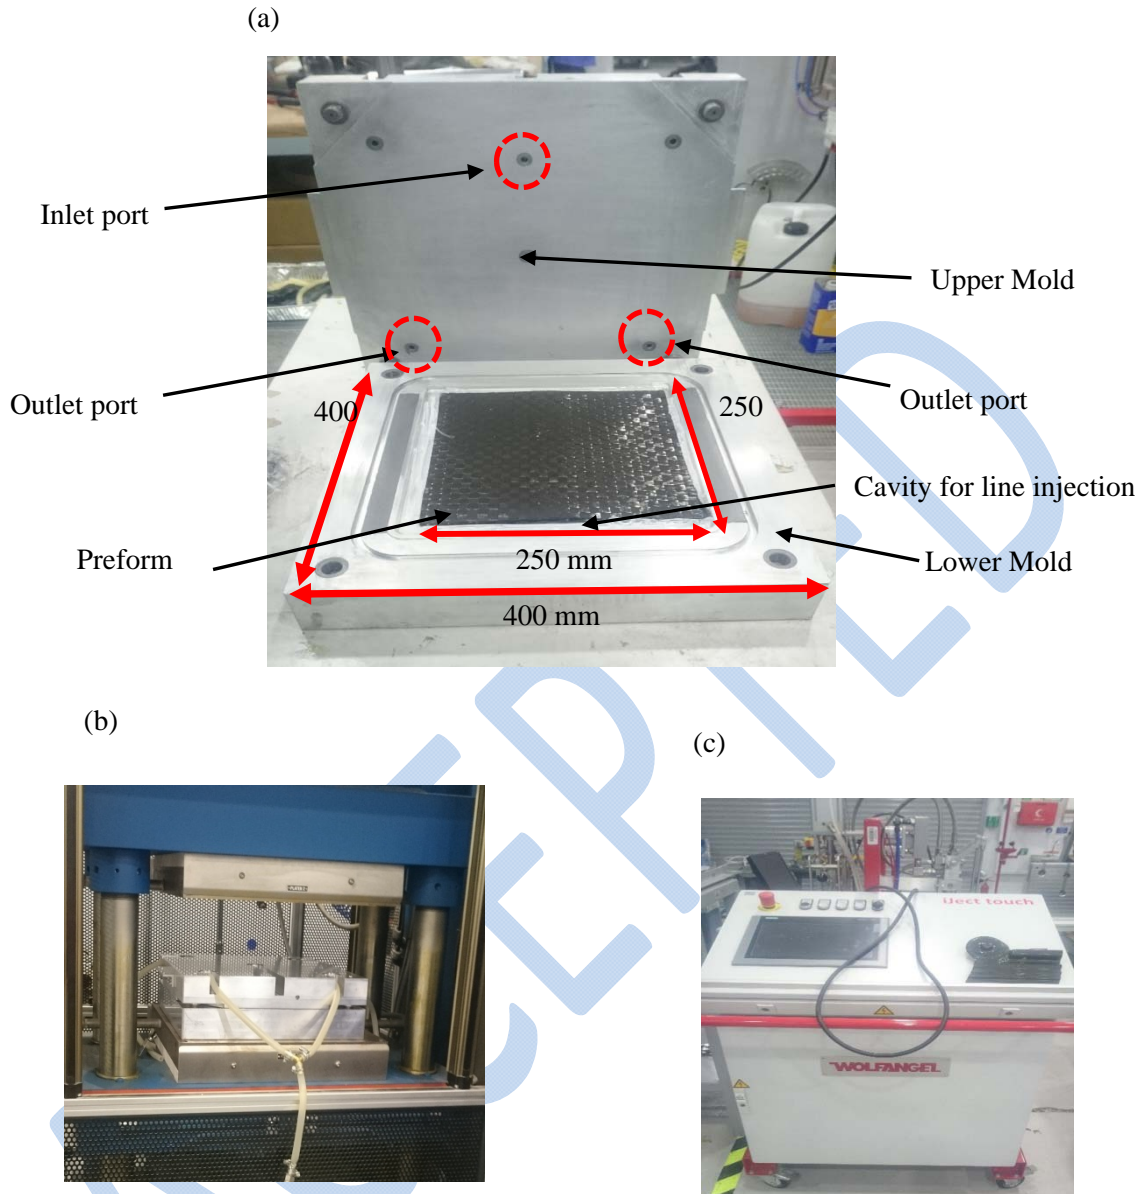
RTM set-up, (a) Upper and lower mold halves, (b) mold in 100 ton hot press (c) resin injection system.
